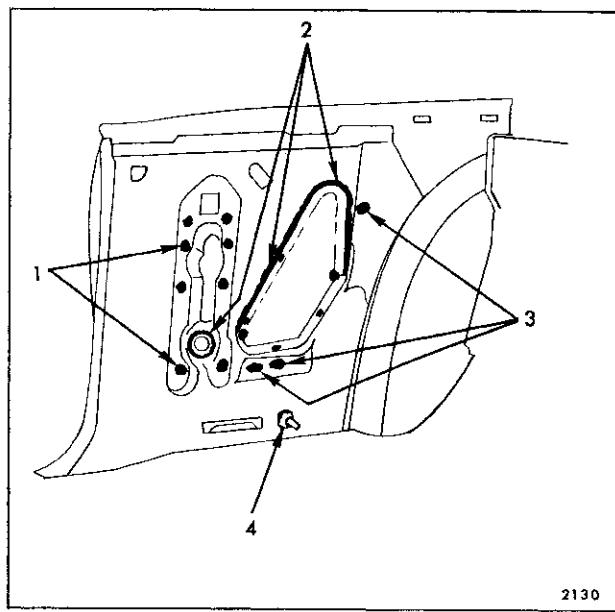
Rear Quarter Inner Panel Sealing - "67" Styles
